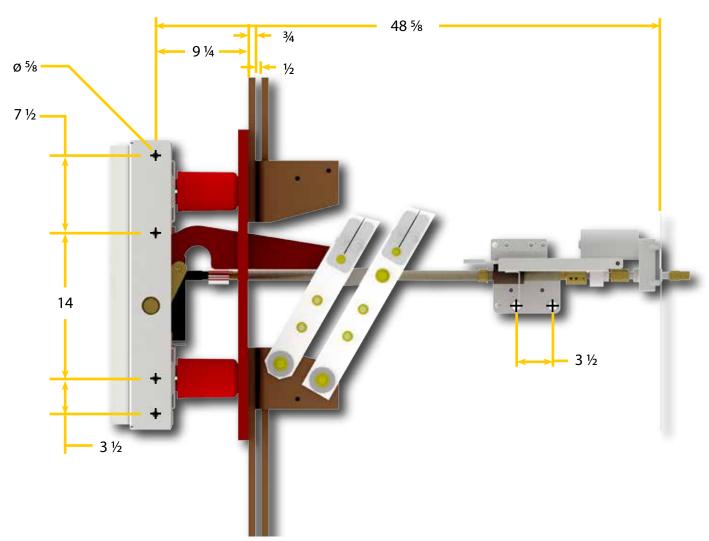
PowlVac® 63kA Disconnect Switch Operating Mechanism Dimensions - Left Side
